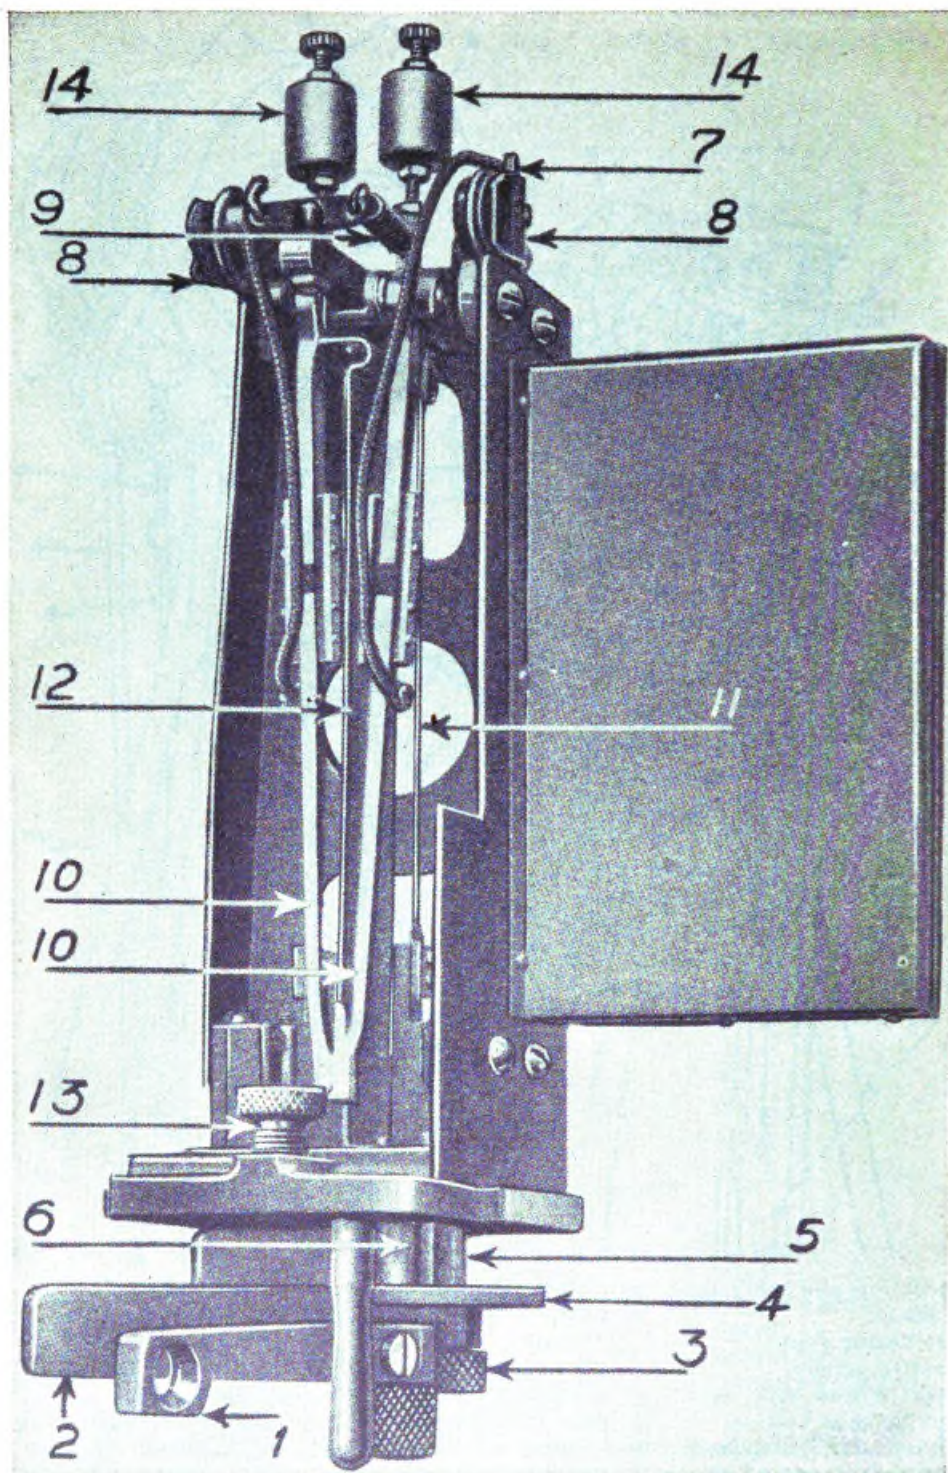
Right side view, 60-inch fixed searchlight.
